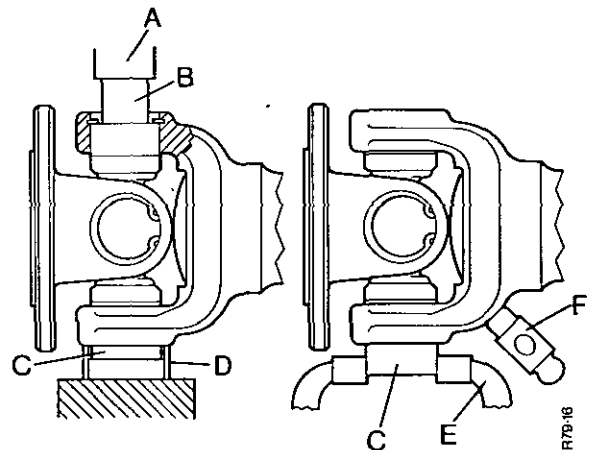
REMOVING BEARING CUPS FROM UNIVERSAL JOINT
